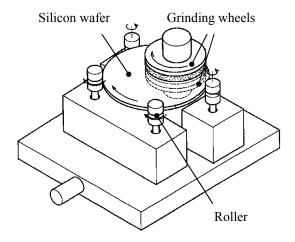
Horizontal machine configuration using cup wheels (after [50]).
